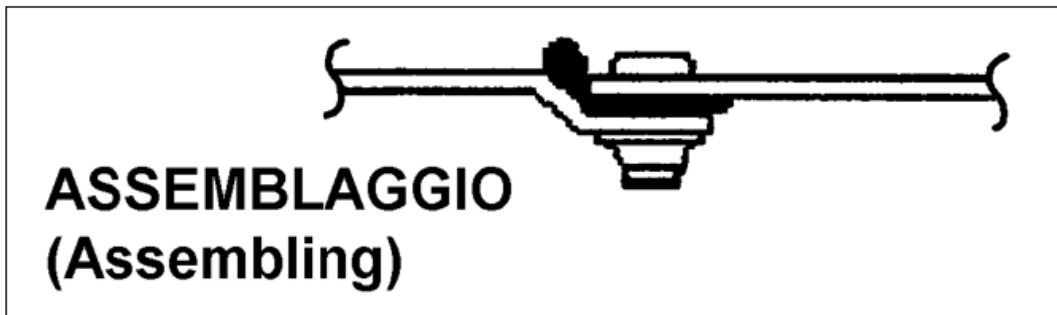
Check that the squeeze out of sealant is uniform along the edge, visible and enough to allow the correct final finishing of the sealing
